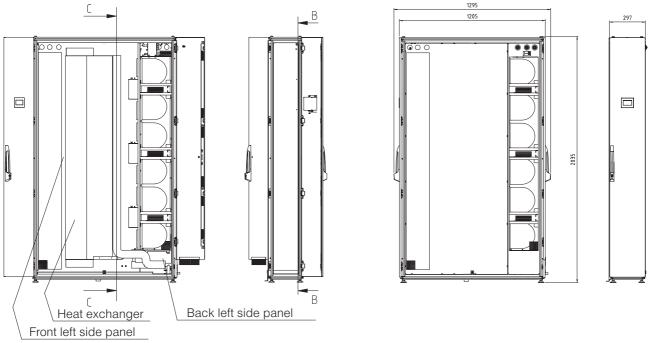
Overview diagram - Liquid Cooling Package Inline (front, side and rear views)
